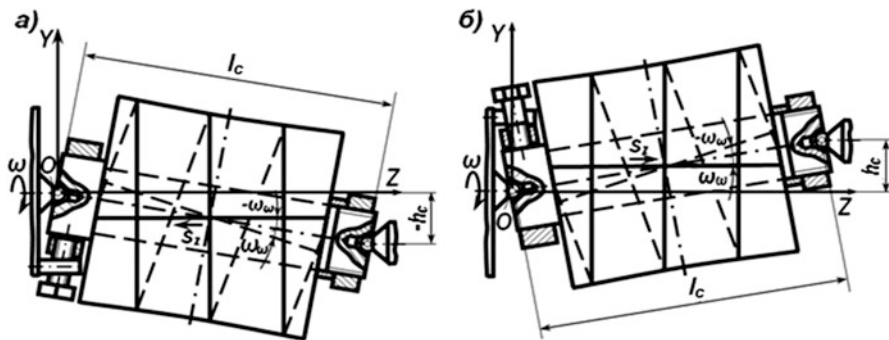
Schematics of machining of the right-handed (a) and left-handed (b) hyperboloid worms with the front location of the support of tool with offset a cutting tool and back center of the machine
